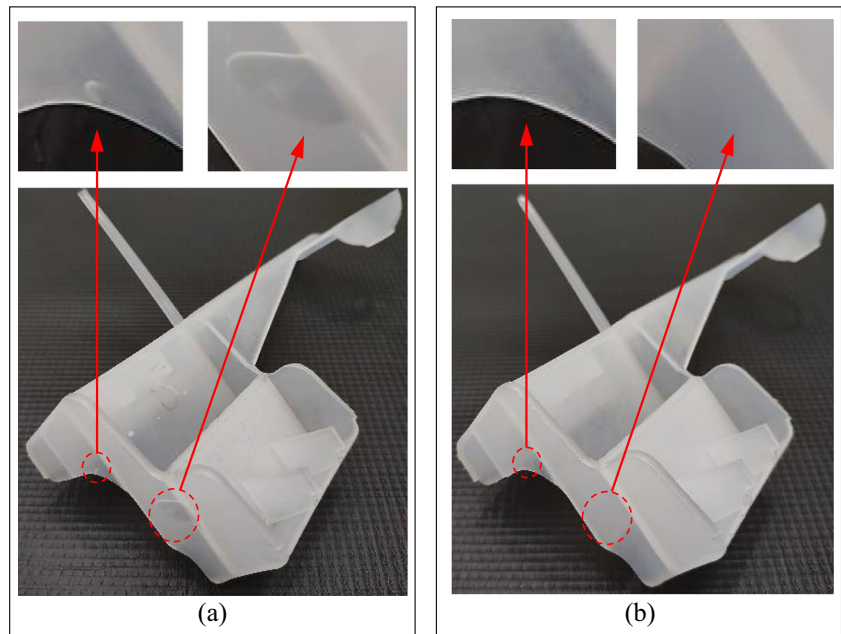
Visual inspection to identify defects in injected parts produced with a baffle inserts and b conformal cooling inserts
